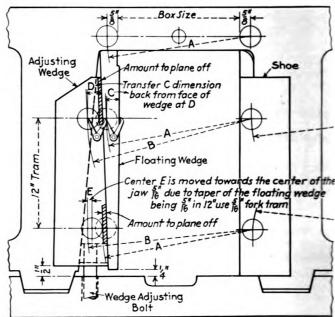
Transferring layout marks to the inside of shoes and wedges
